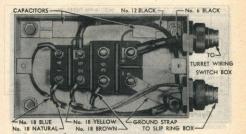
Turret Radio Terminal Box Wiring Connections—M18
